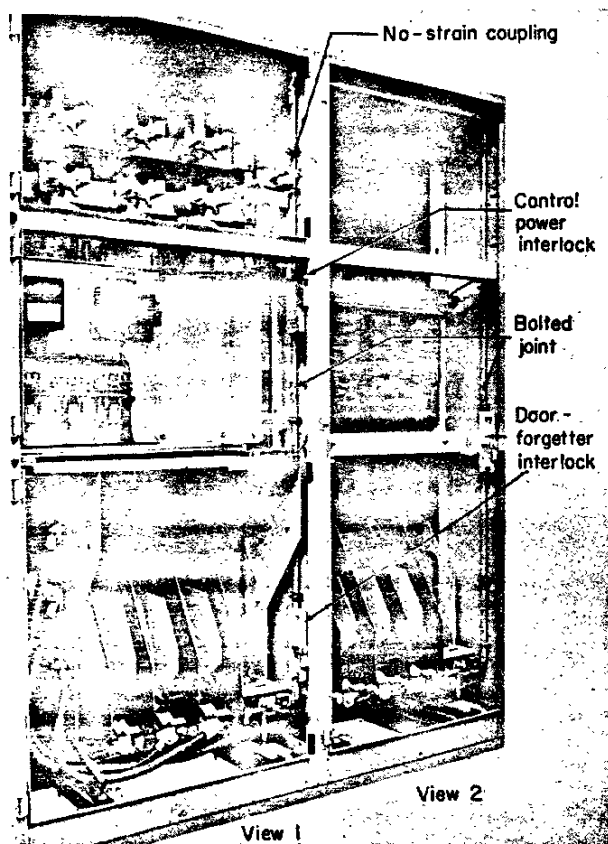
View 1 shows mechanical door interlock as used on basic panels containing isolating switches. View 2 shows additional interlocking arrangement used when panel has one or more sections of high-voltage components connected to the load side of the isolating switch
